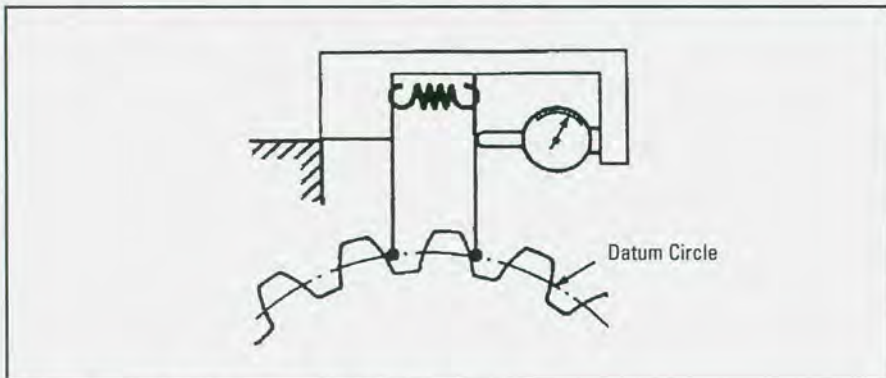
Dual probe index testing. ©AGMA/ANSI 2000-A88.
